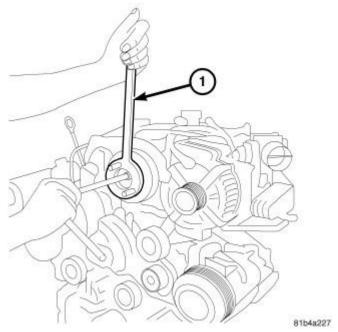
Tightening Camshaft Sprocket Courtesy of CHRYSLER LLC
